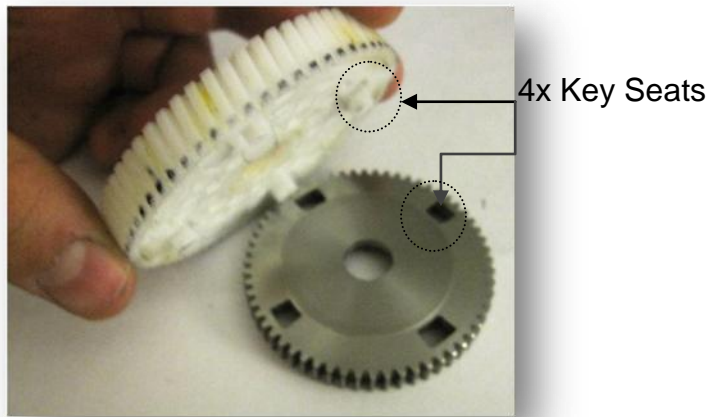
GMT-900 Worm Gear & Top Clutch Plate
